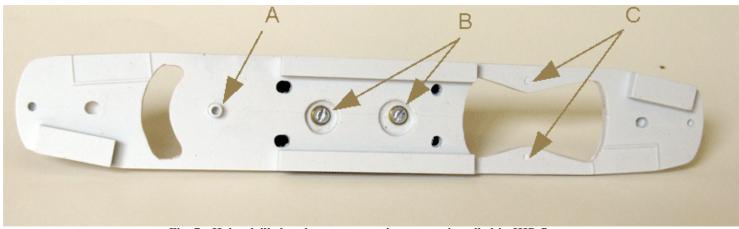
Holes drilled and motor mounting screws installed in IHP floor.
